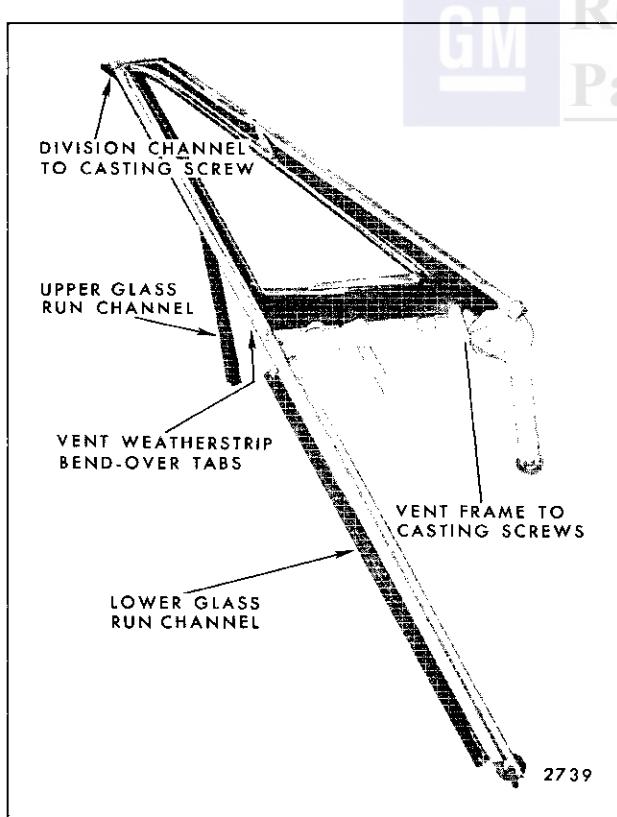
Front Door Ventilator Assembly — "A, B & C" Hardtop and Convertible Styles
